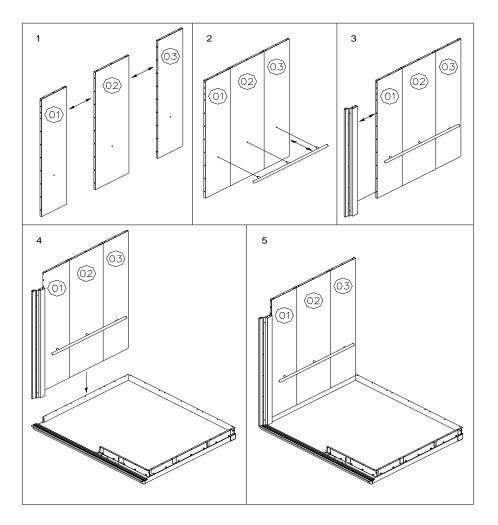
A. CAR PANEL(LEFT SIDE) ASSEMBLY
